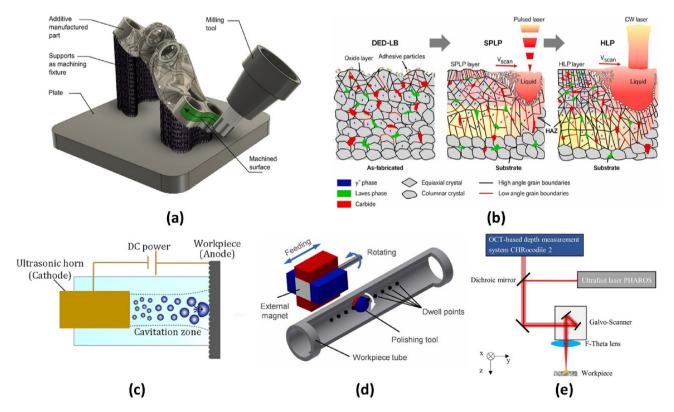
Several processes used in post-processing of additive manufactured parts. (a) Milling machining process used for post-processing of complex AM components. Support structures used as a clamping device [236]. (b) Single-pulsed laser polishing and hybrid laser polishing processes enhance surface characteristics [237]. (c) Hybrid processes such as electrochemical polishing and cavitation peening [238]. (d) Design of magnetic polishing tool [239]. (e) Working principle of laser surface structuring and laser micromachining using ultrashort laser pulses [240].
